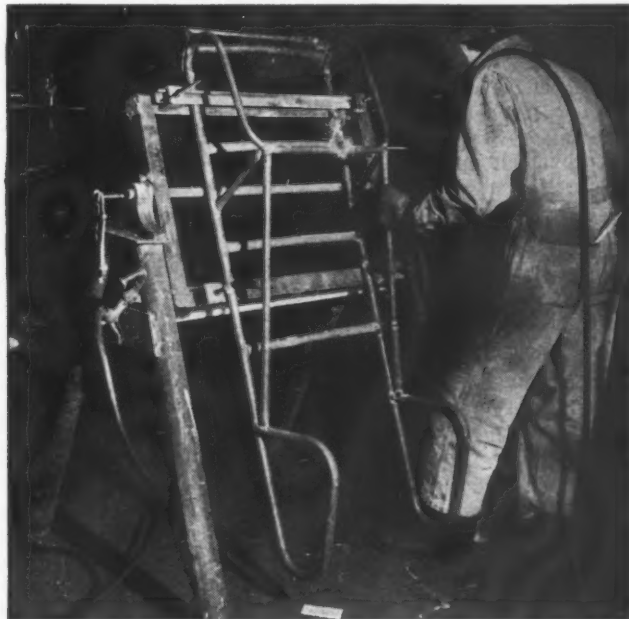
Finish-welding a "stevedore" model. Jig rotates so most welding is in downhand position.
